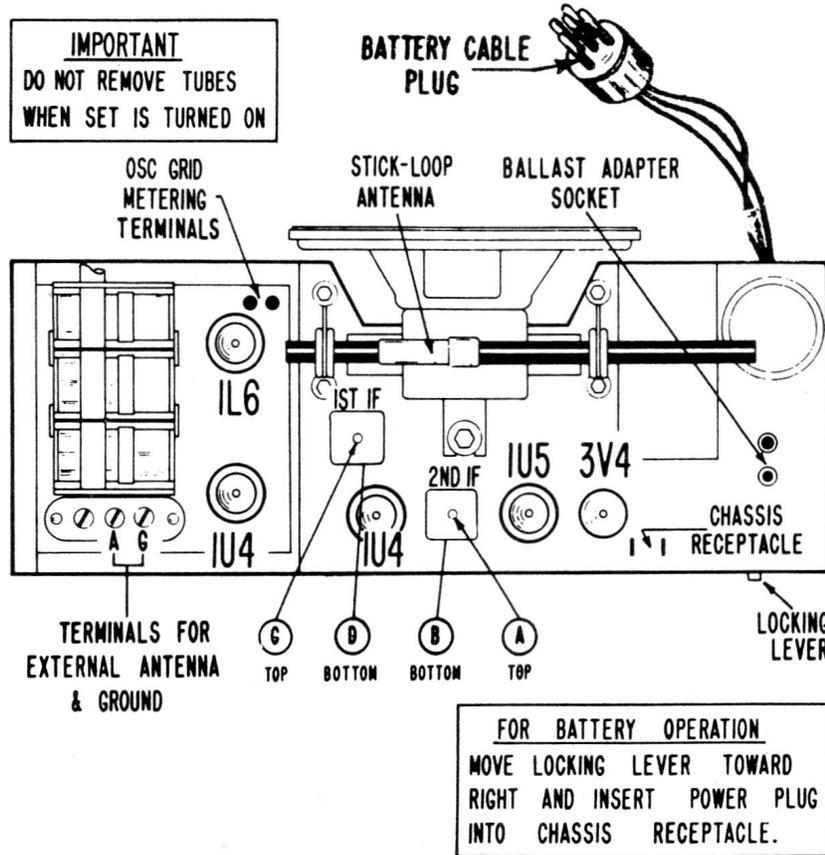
Top View of Chassis Showing Location of Alignment Adjustments and Tubes
